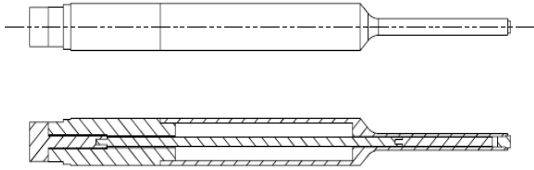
Drawing of LVDT core for cladding tube length deformation measuring
